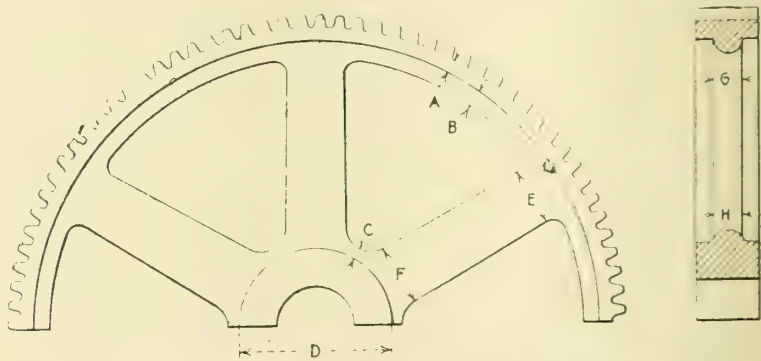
DIMENSIONS OF ARMS OF GEARS TESTED.
